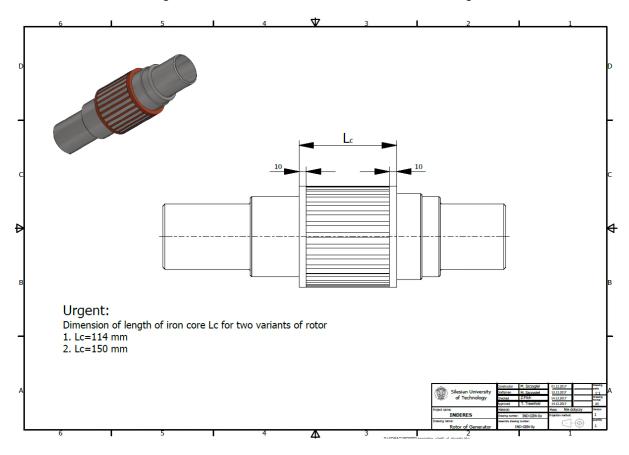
Dimensions of the Rotor Iron Core for Two Variants of Iron Length
